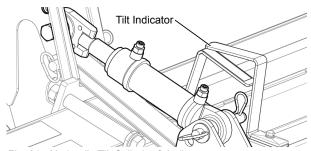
Hydraulic Tilt Cylinder & Indicator
